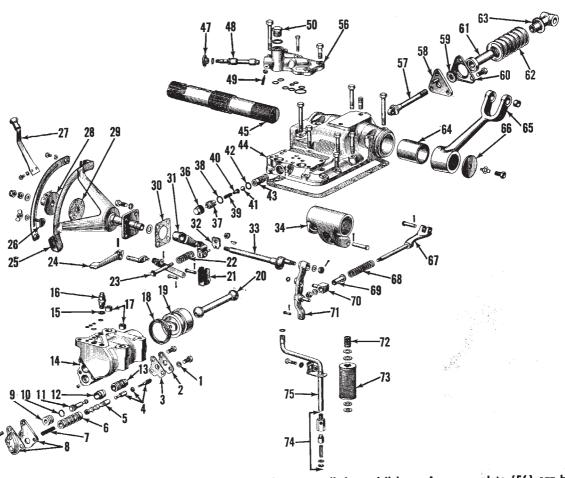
Exploded view of early Fordson Dexta hydraulic lift cover, cylinder and linkage. Accessory plate (56) can be replaced with flow control valve (54—Fig. FO564) if complete valve and linkage are used. Although component parts are different, complete lift cylinder assembly (14) is interchangeable with later type complete lift cylinder assembly (14A — Fig. FO564). - Fig. FO564).
